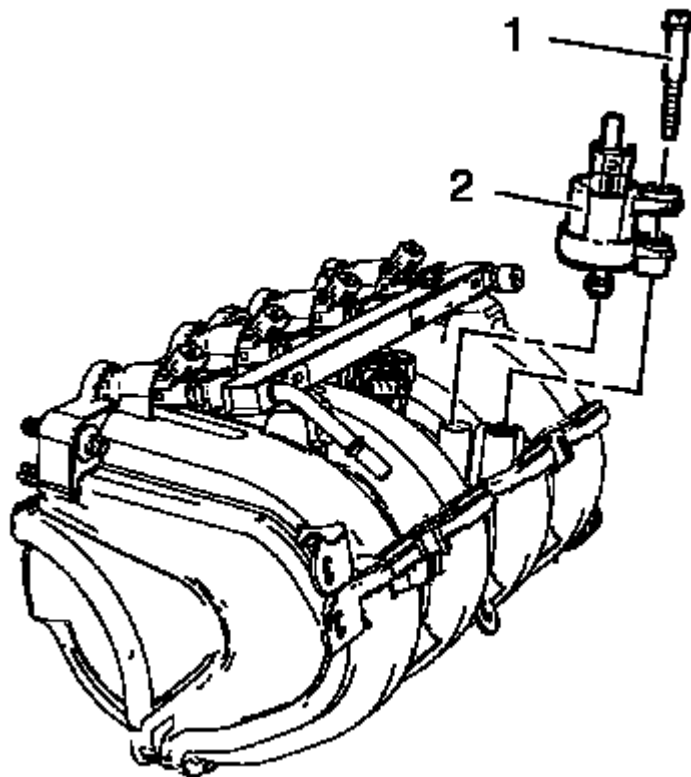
Evaporative Emission Canister Purge Solenoid Valve And Bolt
